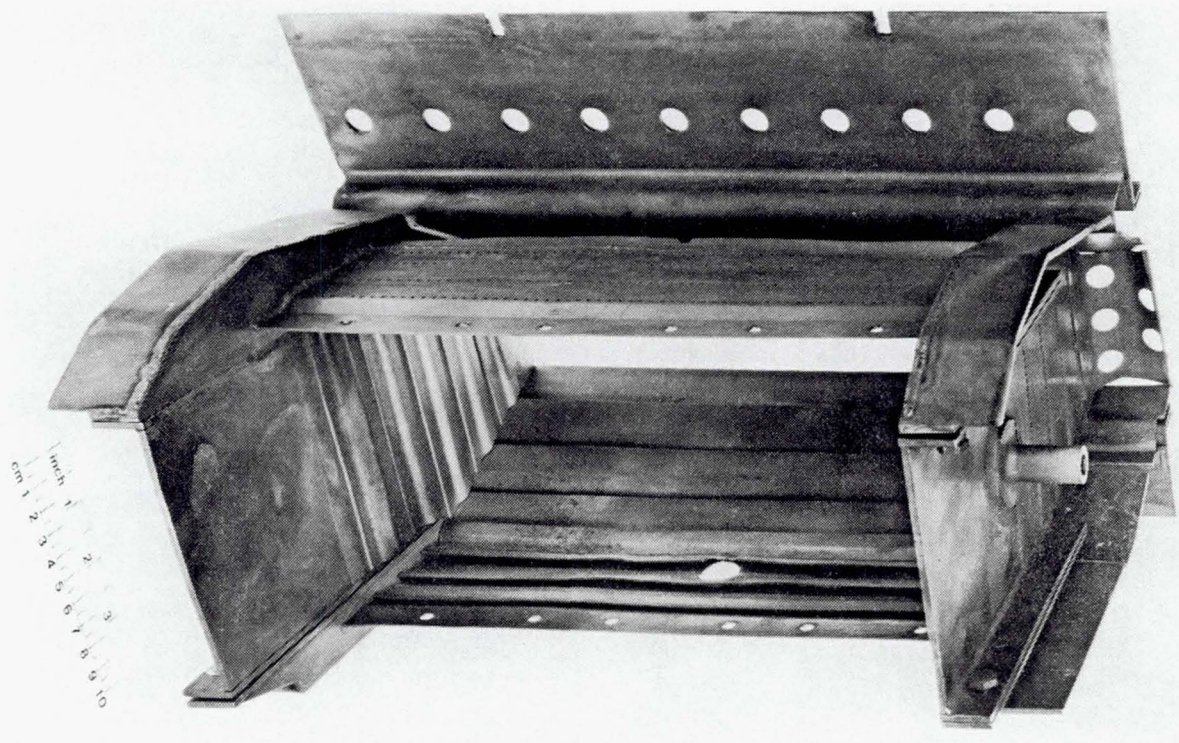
Mark IV Combustor Sector Liner Assembly.
